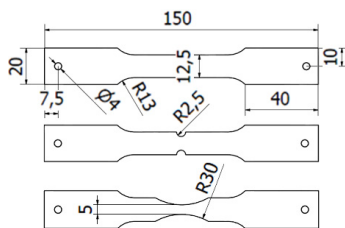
Geometries of the simple tensile test specimen (up), the notched tensile test specimen (middle), and the modified specimen (bottom).
